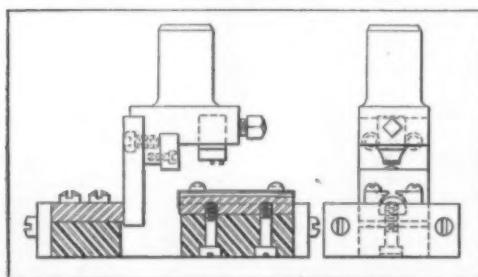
Shear, punch and die used for cutting off and forming the new blades.
